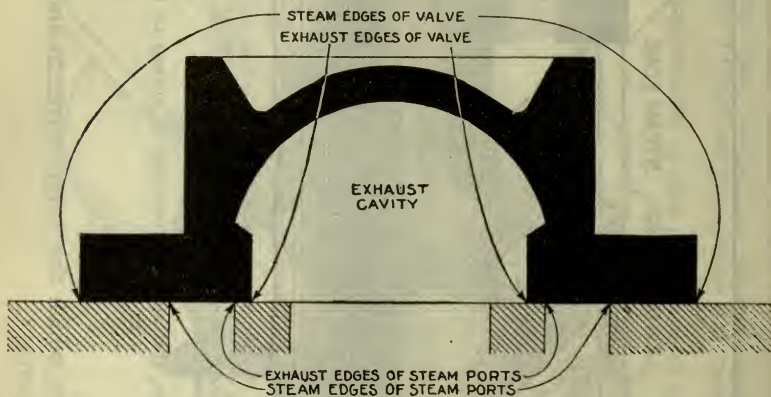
Sectional view of valve on seat illustrating the term steam edge, exhaust edge of both valve and seat.
